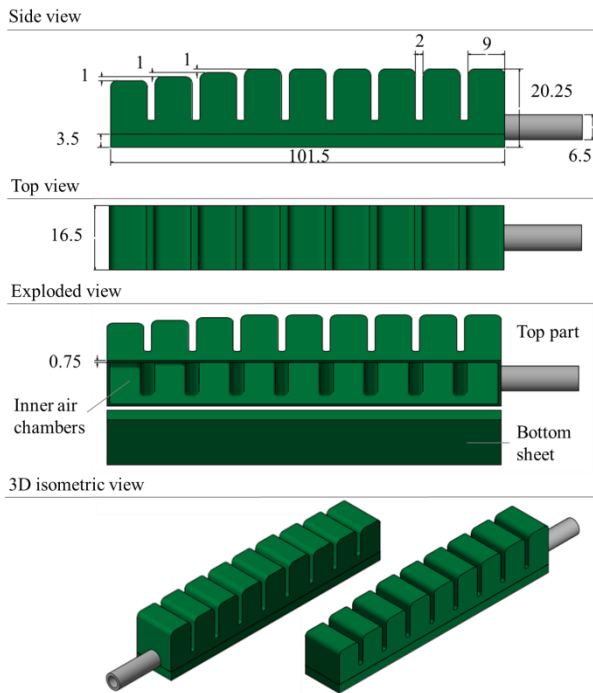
Design of the self-healing bending soft pneumatic actuator completely constructed out of DPBM-FT5000-r0.5 polymer. Dimensions are presented in millimetres.
